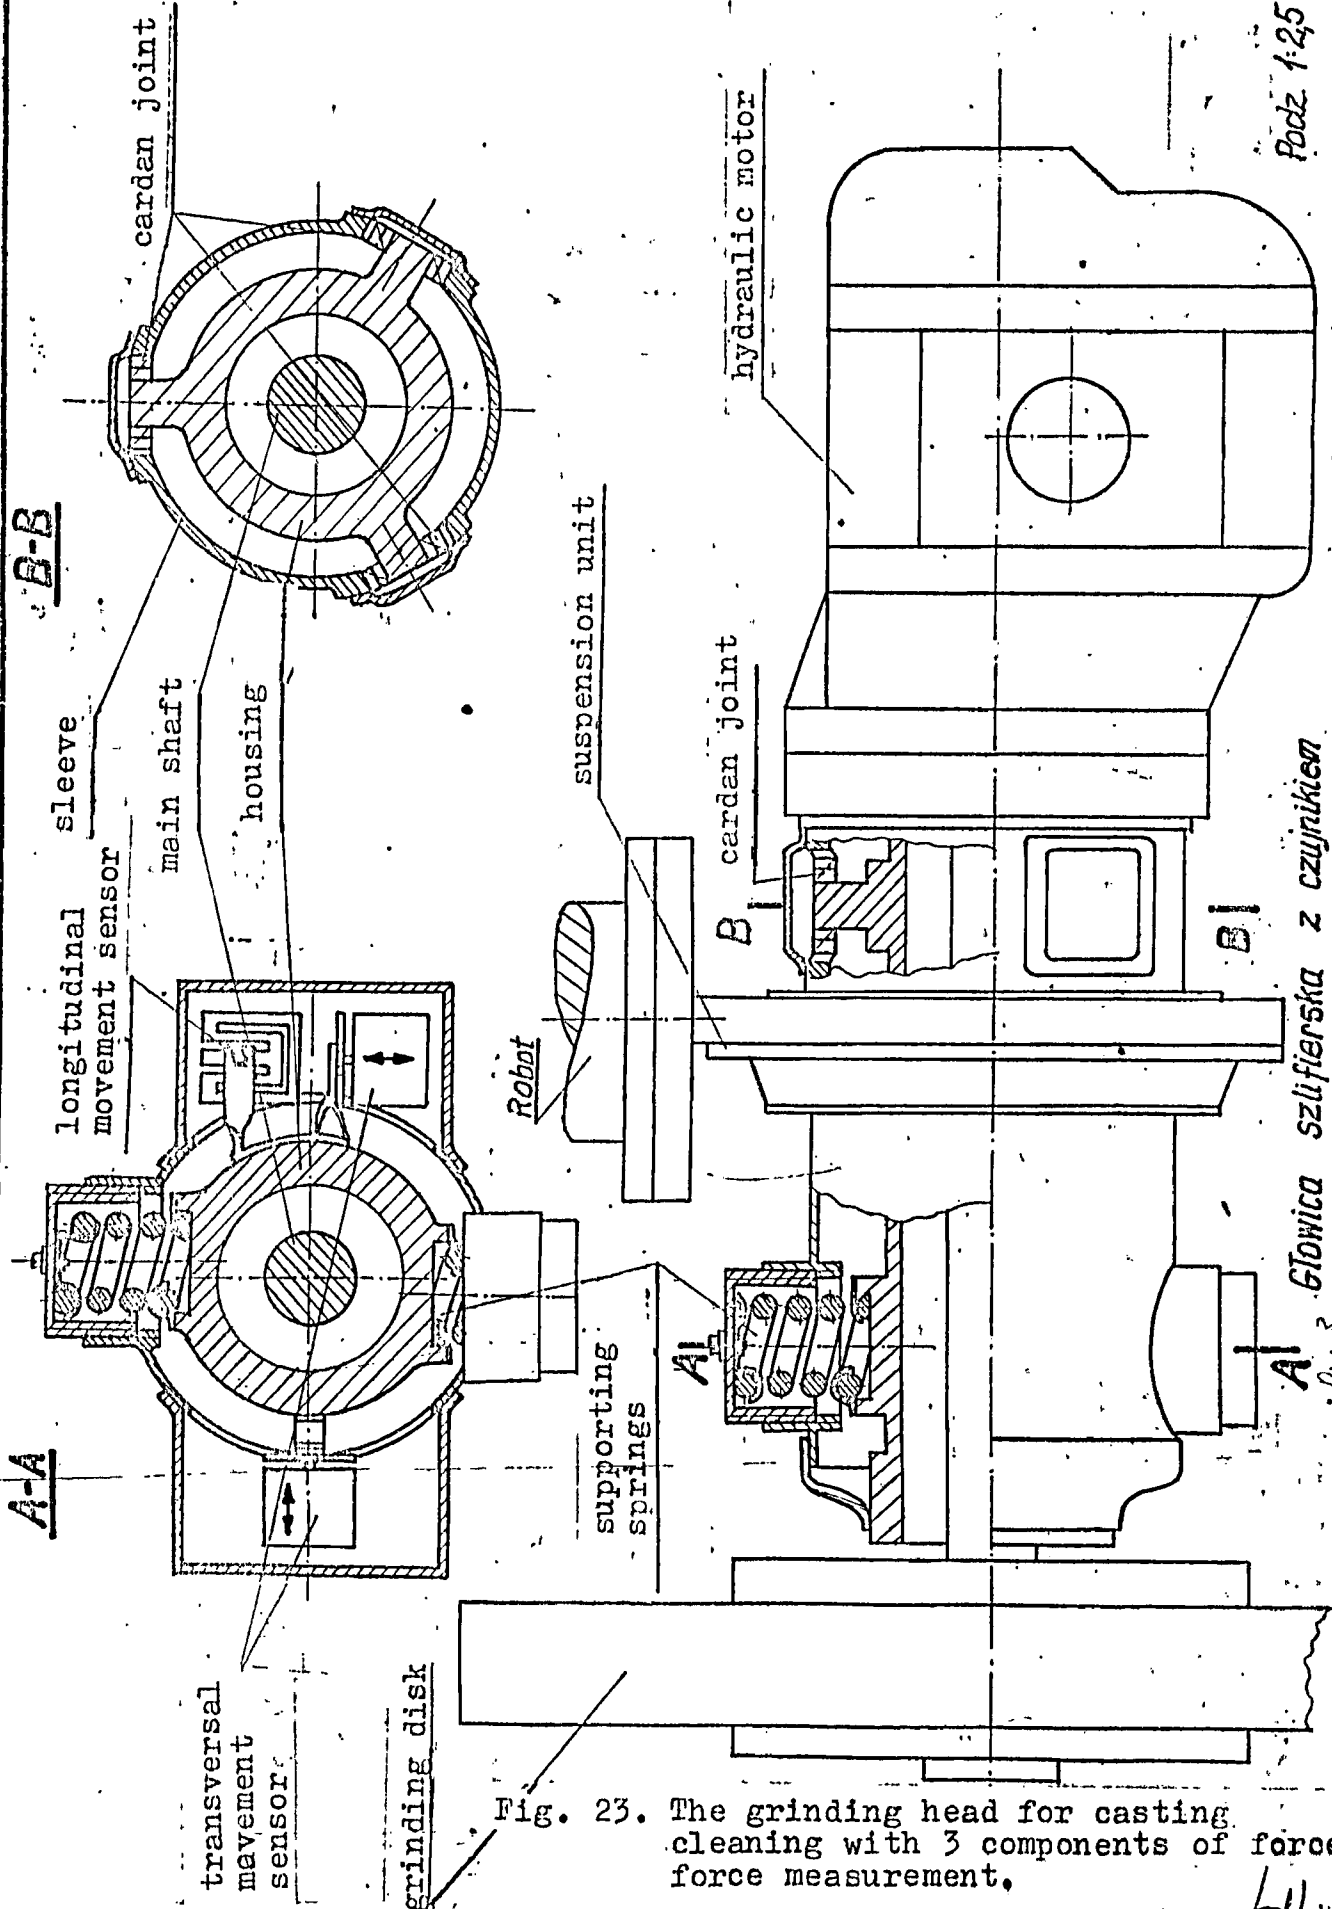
The grinding head for casting cleaning with 3 components of force force measurement.
